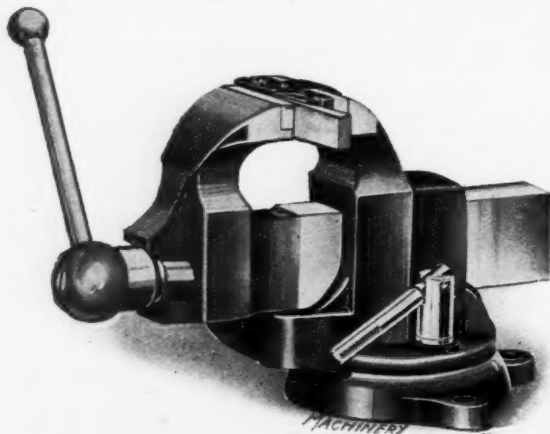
Vise Attachment for holding Tapered Work in a Horizontal Position
